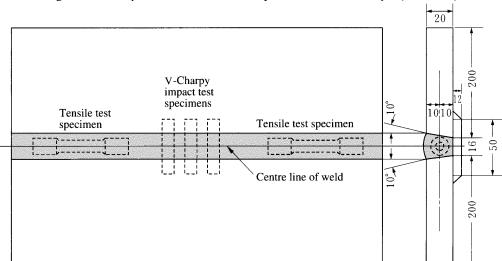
Deposited Metal Test Assembly with Multi-run Technique (Unit: mm)
